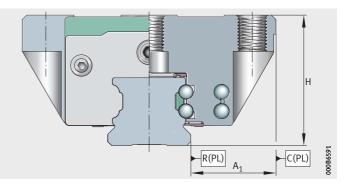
Datum dimensions for accuracy Units with coating
